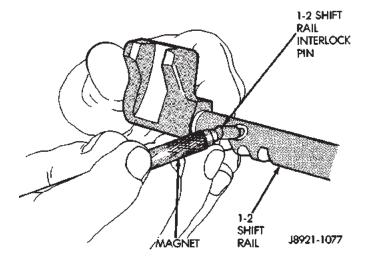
Remove 1-2 Shift Rail Interlock Pin
